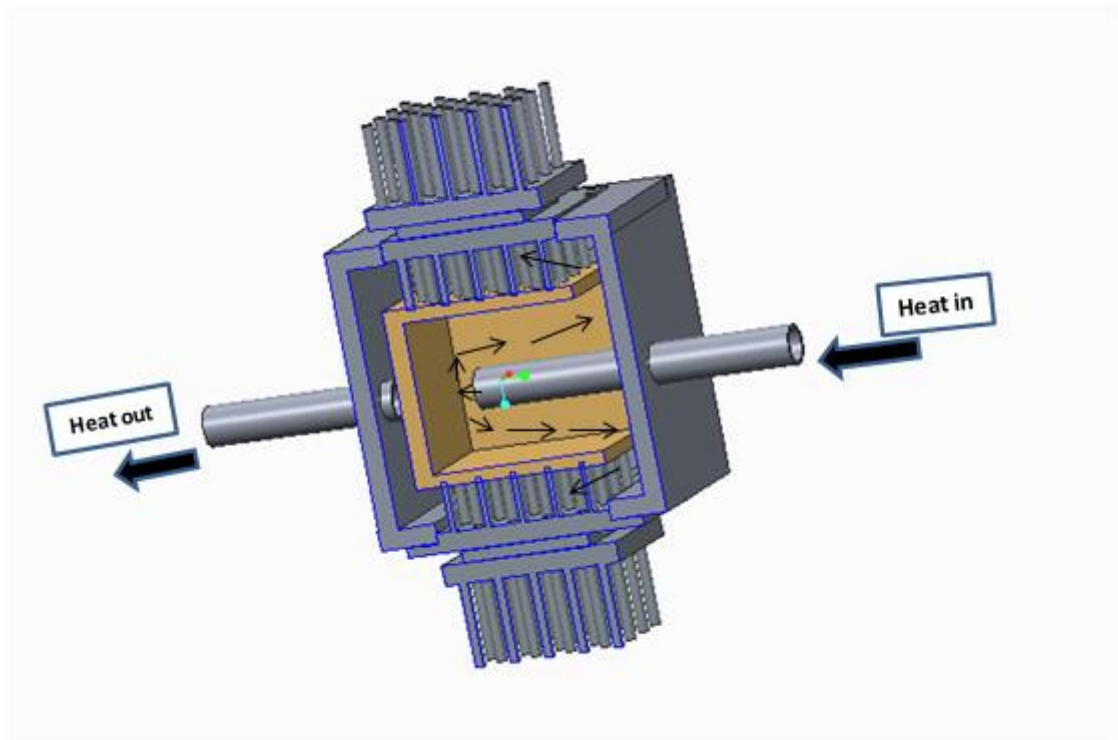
A cross-sectional view of Thermoelectric conversion device with inlet and outlet
